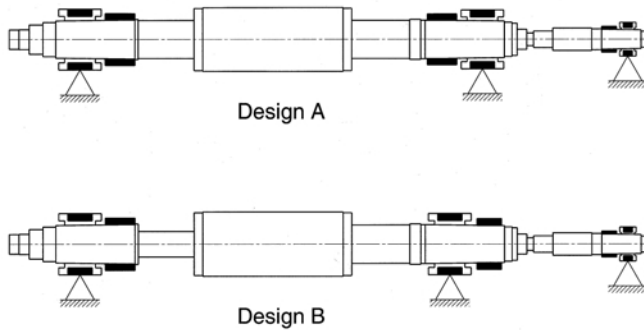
Two Types of Rotor Bearing Designs Were Studied; Design "B" Was Finally Chosen.
